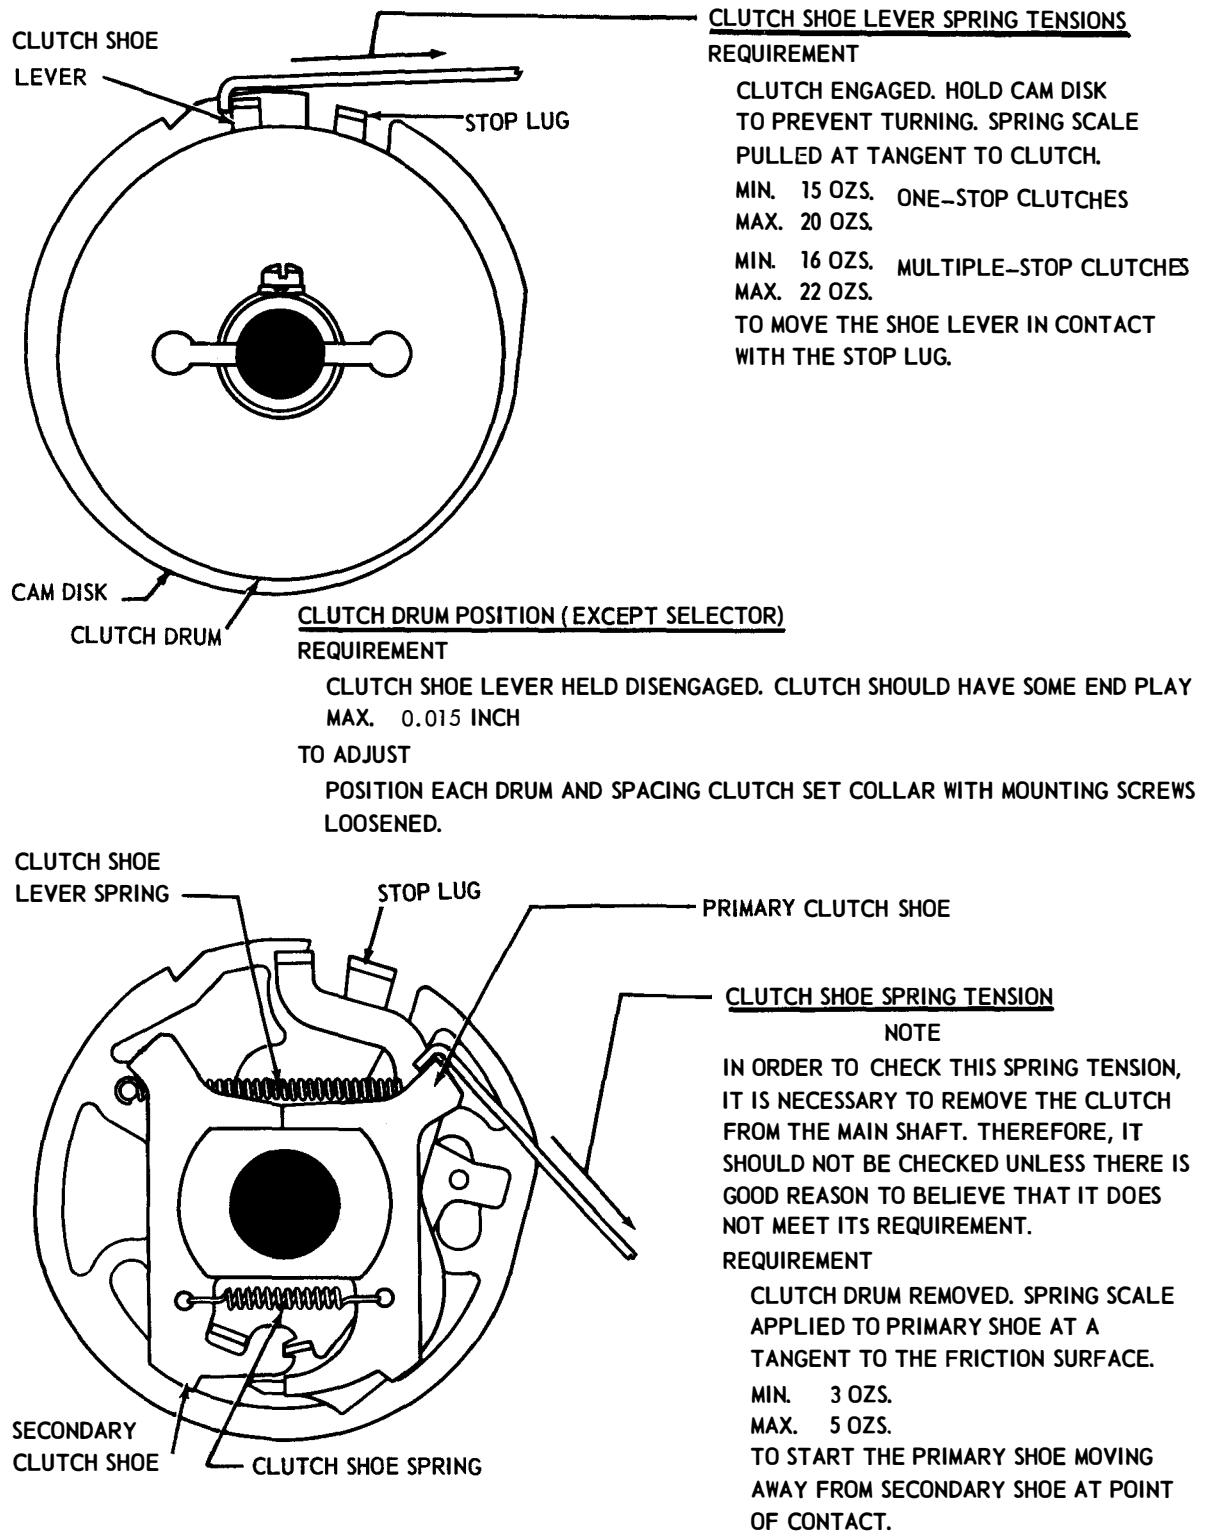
Automatic Typewriter, Clutch Mechanism, Left Side View
